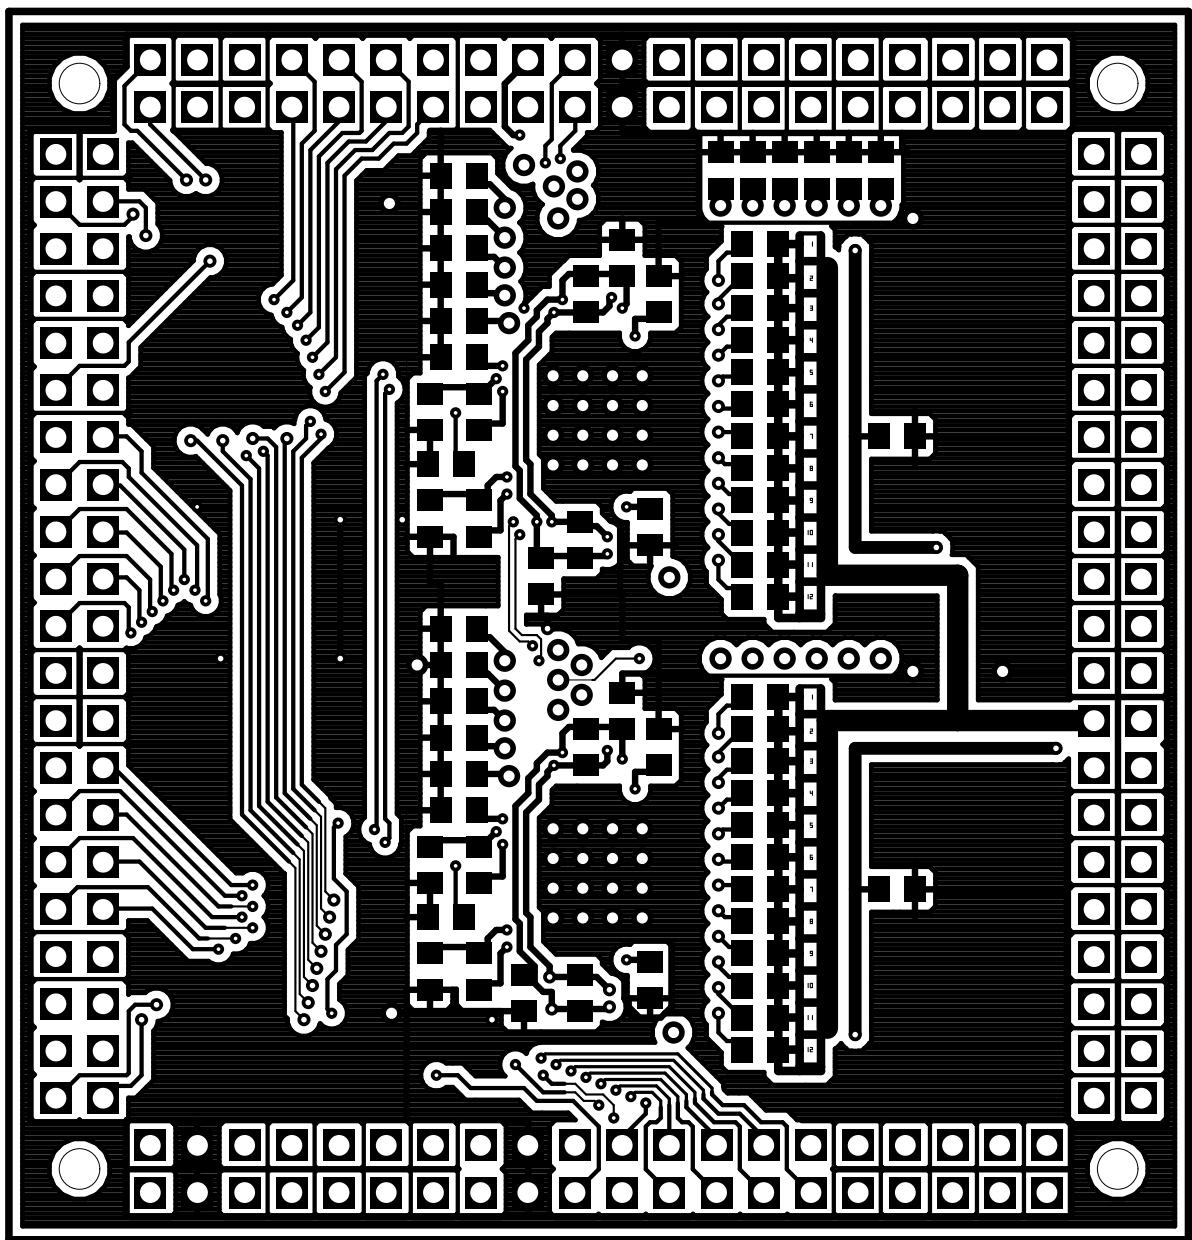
Bottom layer of the Heidelberg daughter PCB (version 03/2003).
